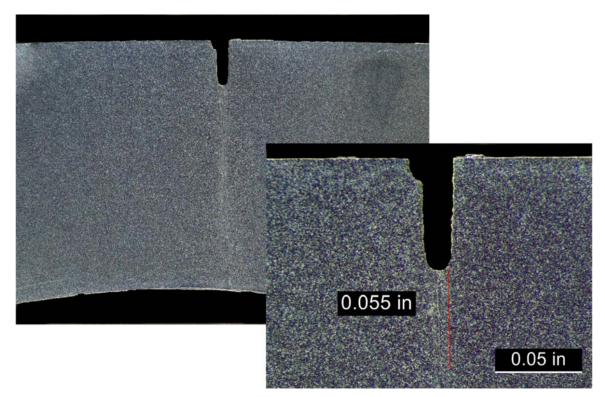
Transverse post-test sectional view of the EDM Notch C (with observed crack)
